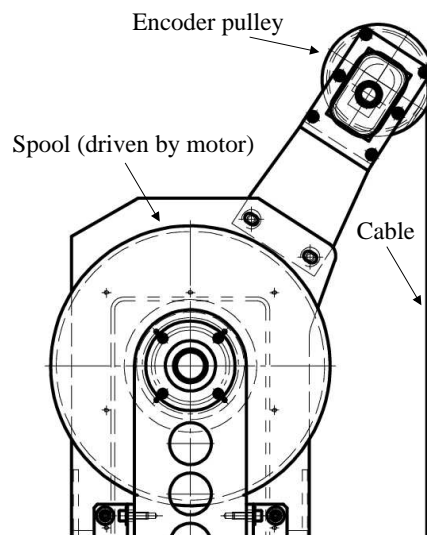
Technical drawing illustrating the arrangement of the spool and encoder pulley for one cable.
